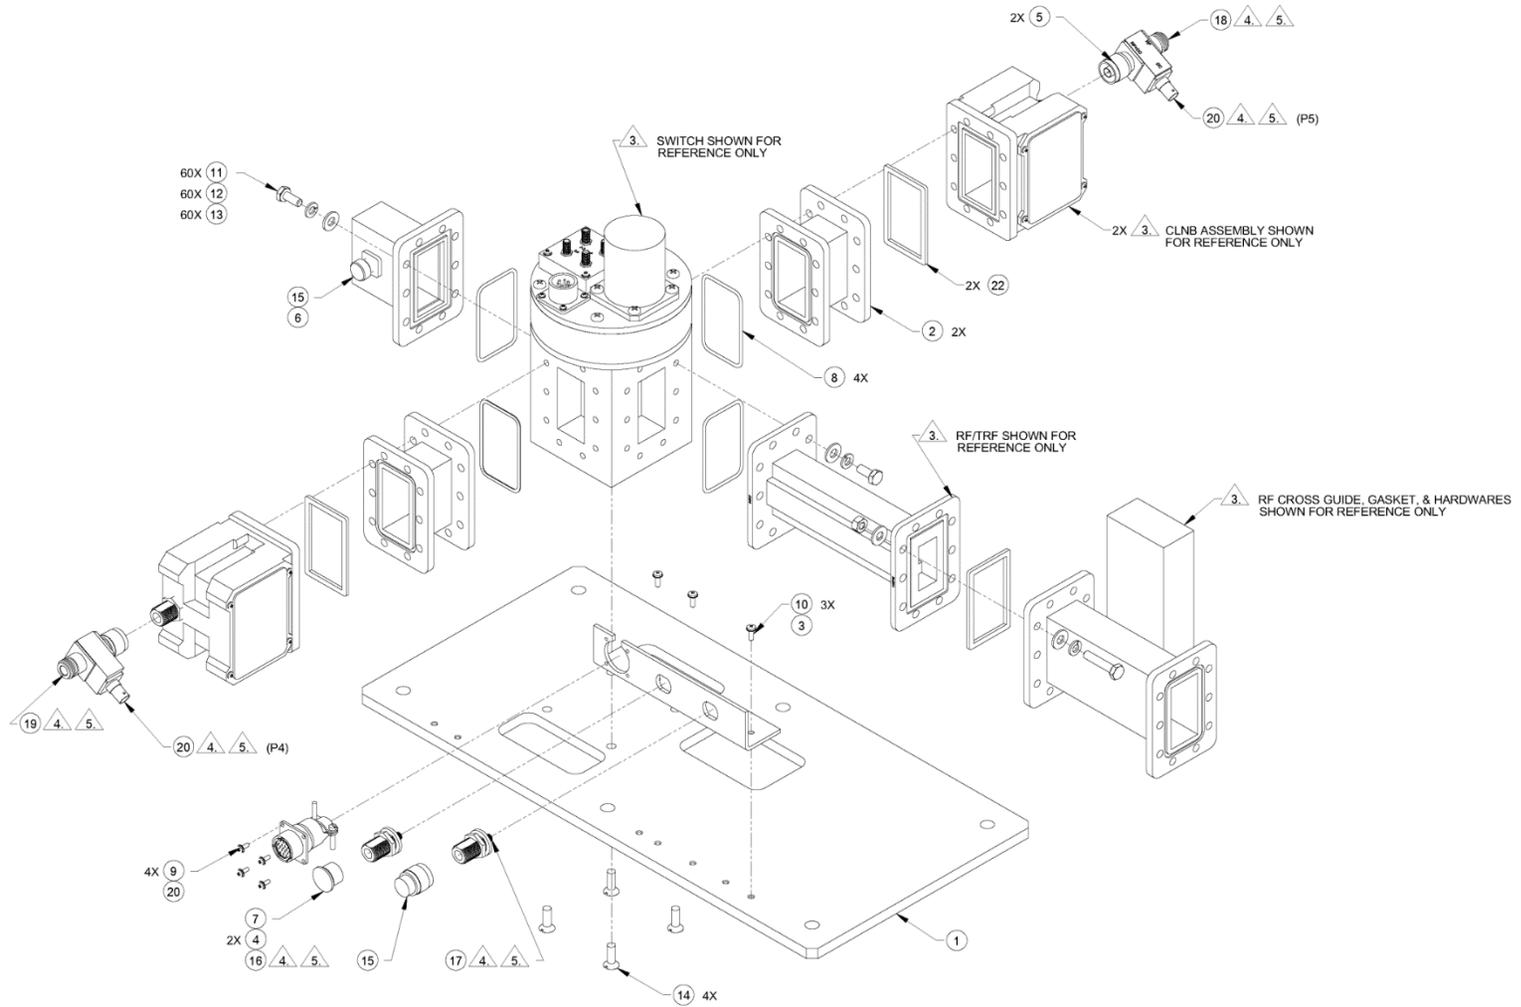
C-Band LNB 1:1 Redundant System (Exploded View)
